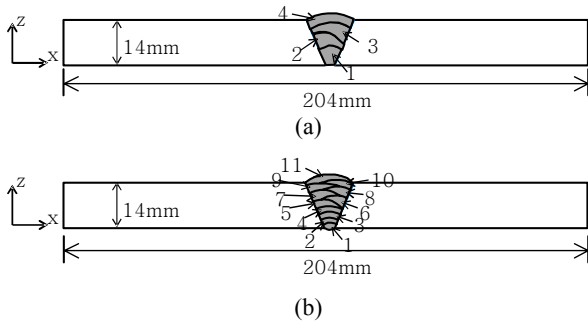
Weld bead position of (a) Flux cored arc welding and (b) Gas tungsten arc welding
